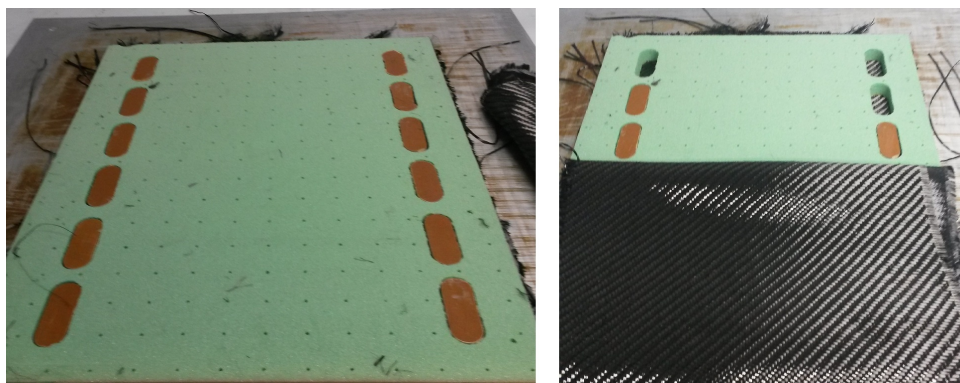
Tufnol inserts placed into pre-cut holes in the foam core before resin infusion.
